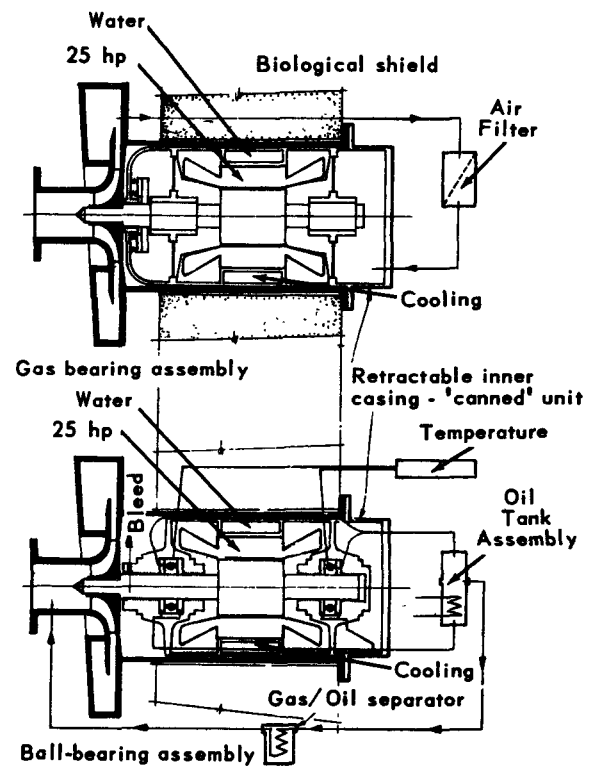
Comparison/conversion of gas bearing to ball-bearing machines
